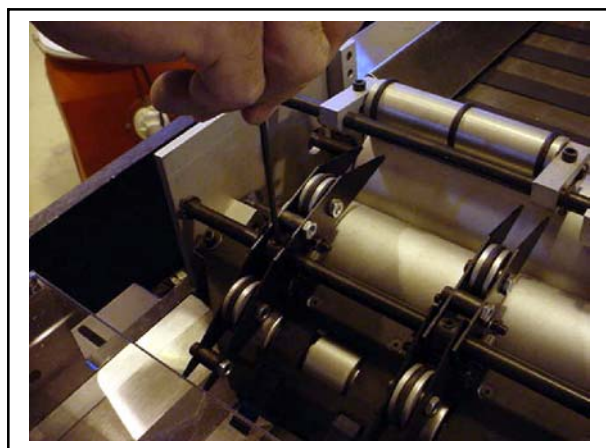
Adjust Pullback Hold-Down Rollers
